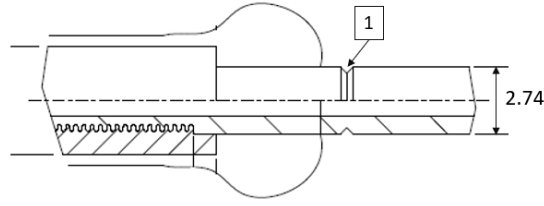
Drawing of the end of the plated mandrel showing the diameter of the masked aluminum in millimeters and the location of the reference groove (1).
